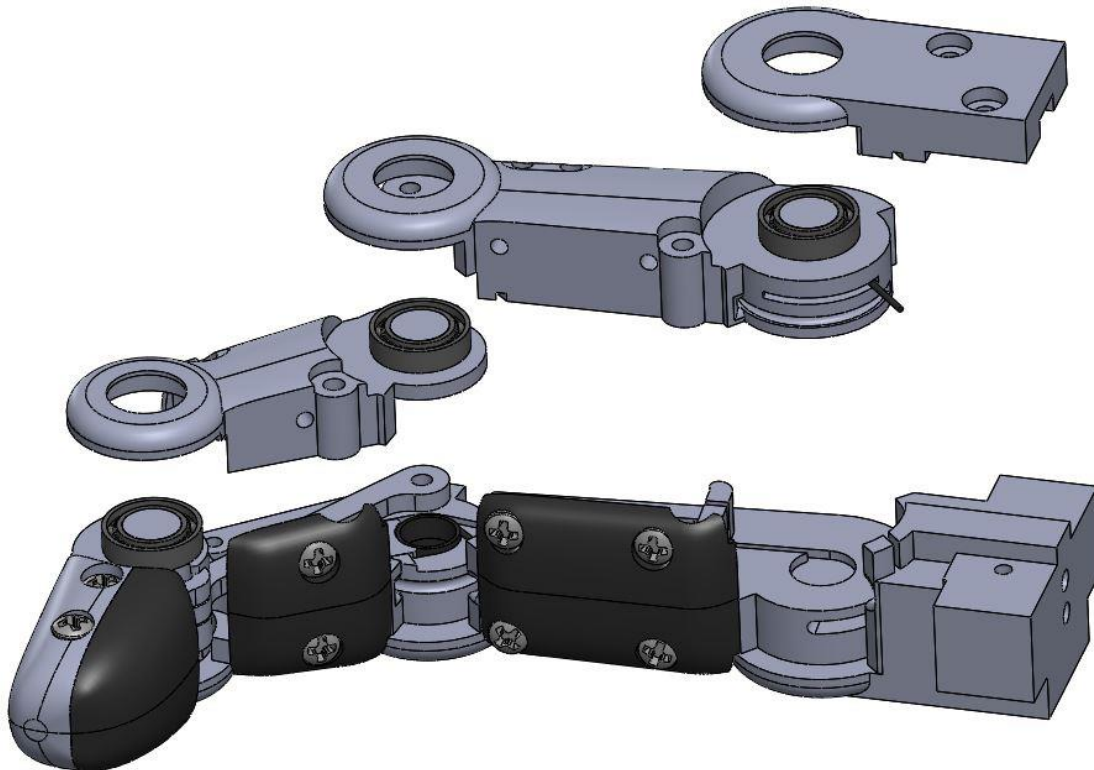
An exploded view of the finger, showing the shaft-less joint design, comprised of cantilevered hubs with radial bearings.
